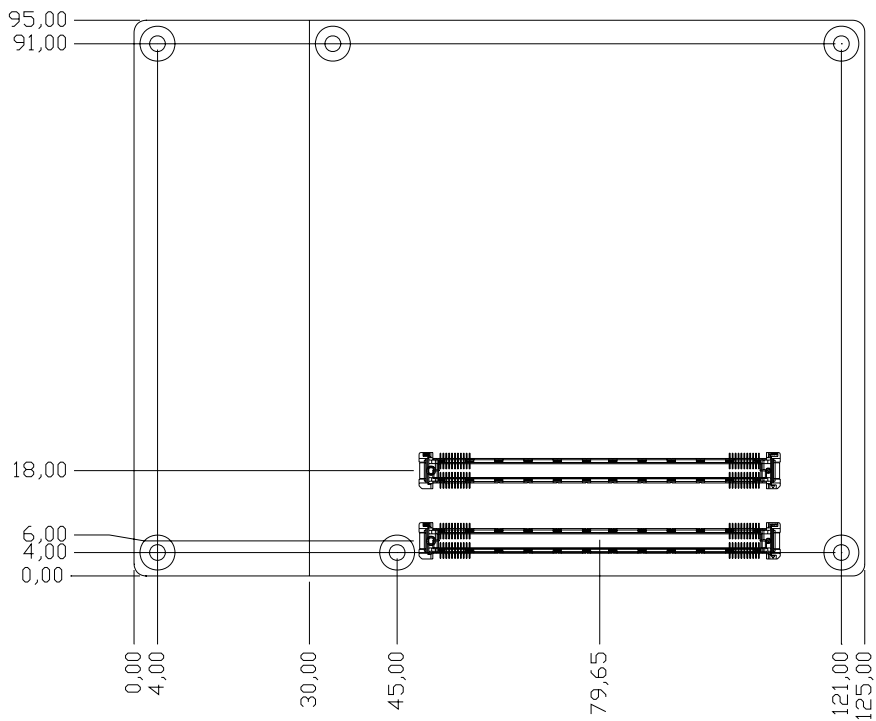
SOM-5761 Board Dimension layout (Solder side)
